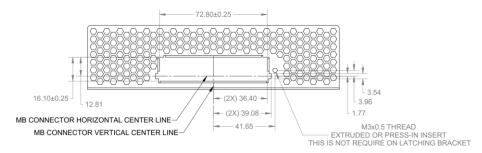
Small Form Factor Baseboard Chassis to Card Thumb Screw CTF Dimensions (Side View)
